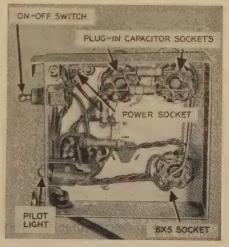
Parts layout and wiring on the underside of the power-supply chassis.
